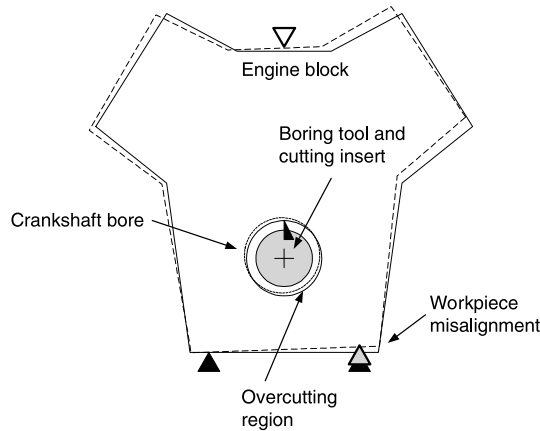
Non-uniform depth of cut due to workpiece misalignment error.
